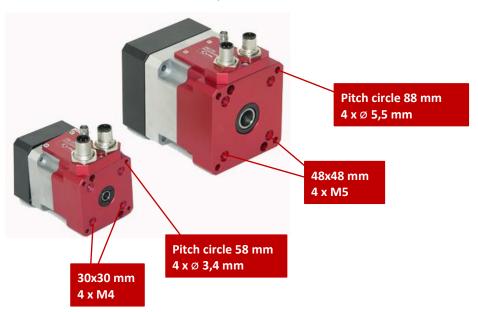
Mounting holes on the rotary module RE-50 & RE-75
